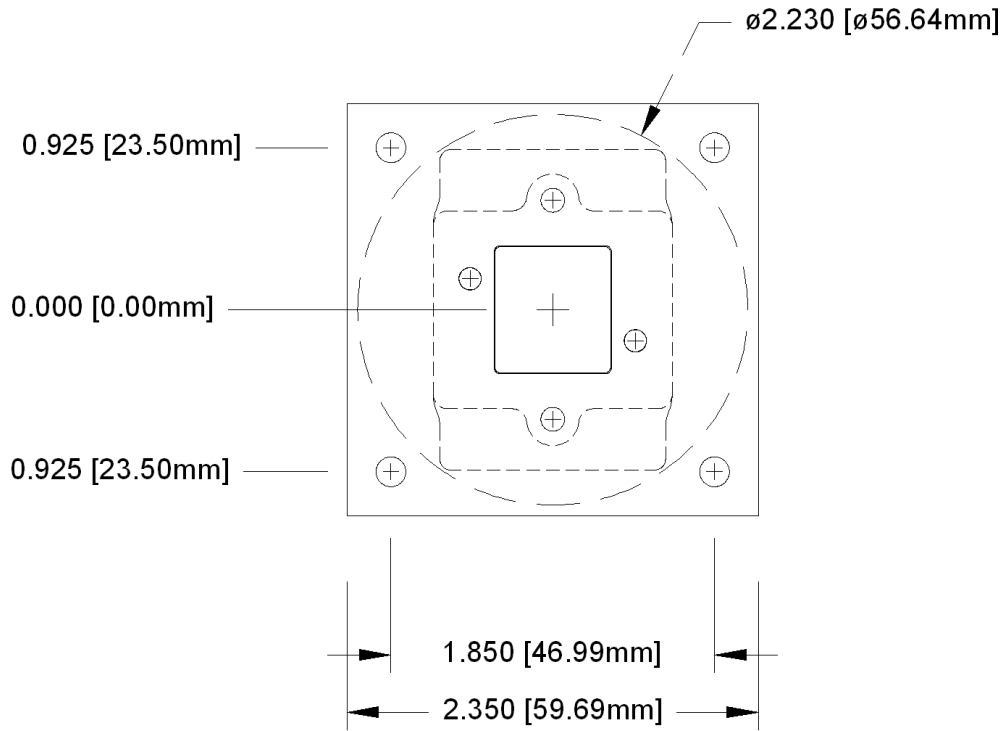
Panel Cutout, #4-40 Mounting Screws
